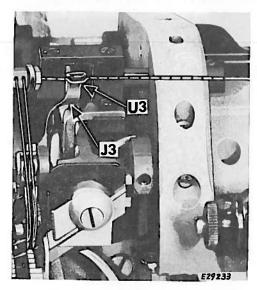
Needle Thread Controller in Correct Relation to Needle Thread
